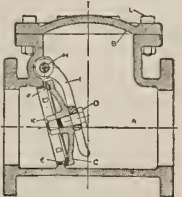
SECTIONAL VIEW OF FLANGED IRON BODY, BRONZE MOUNTED SWING CHECK VALVES
